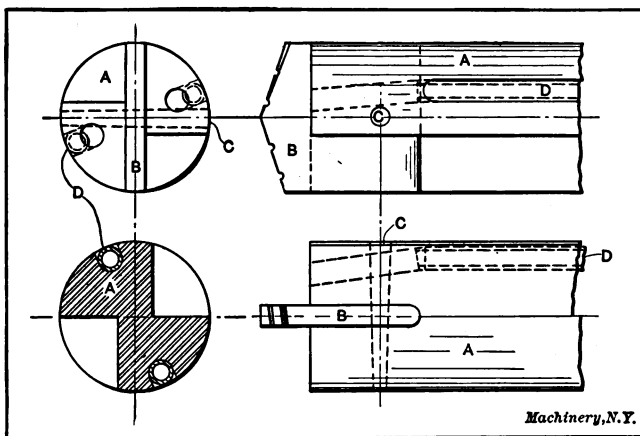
The Drill used for Deep Boring in the Machines shown in Figs. 3 and 4
